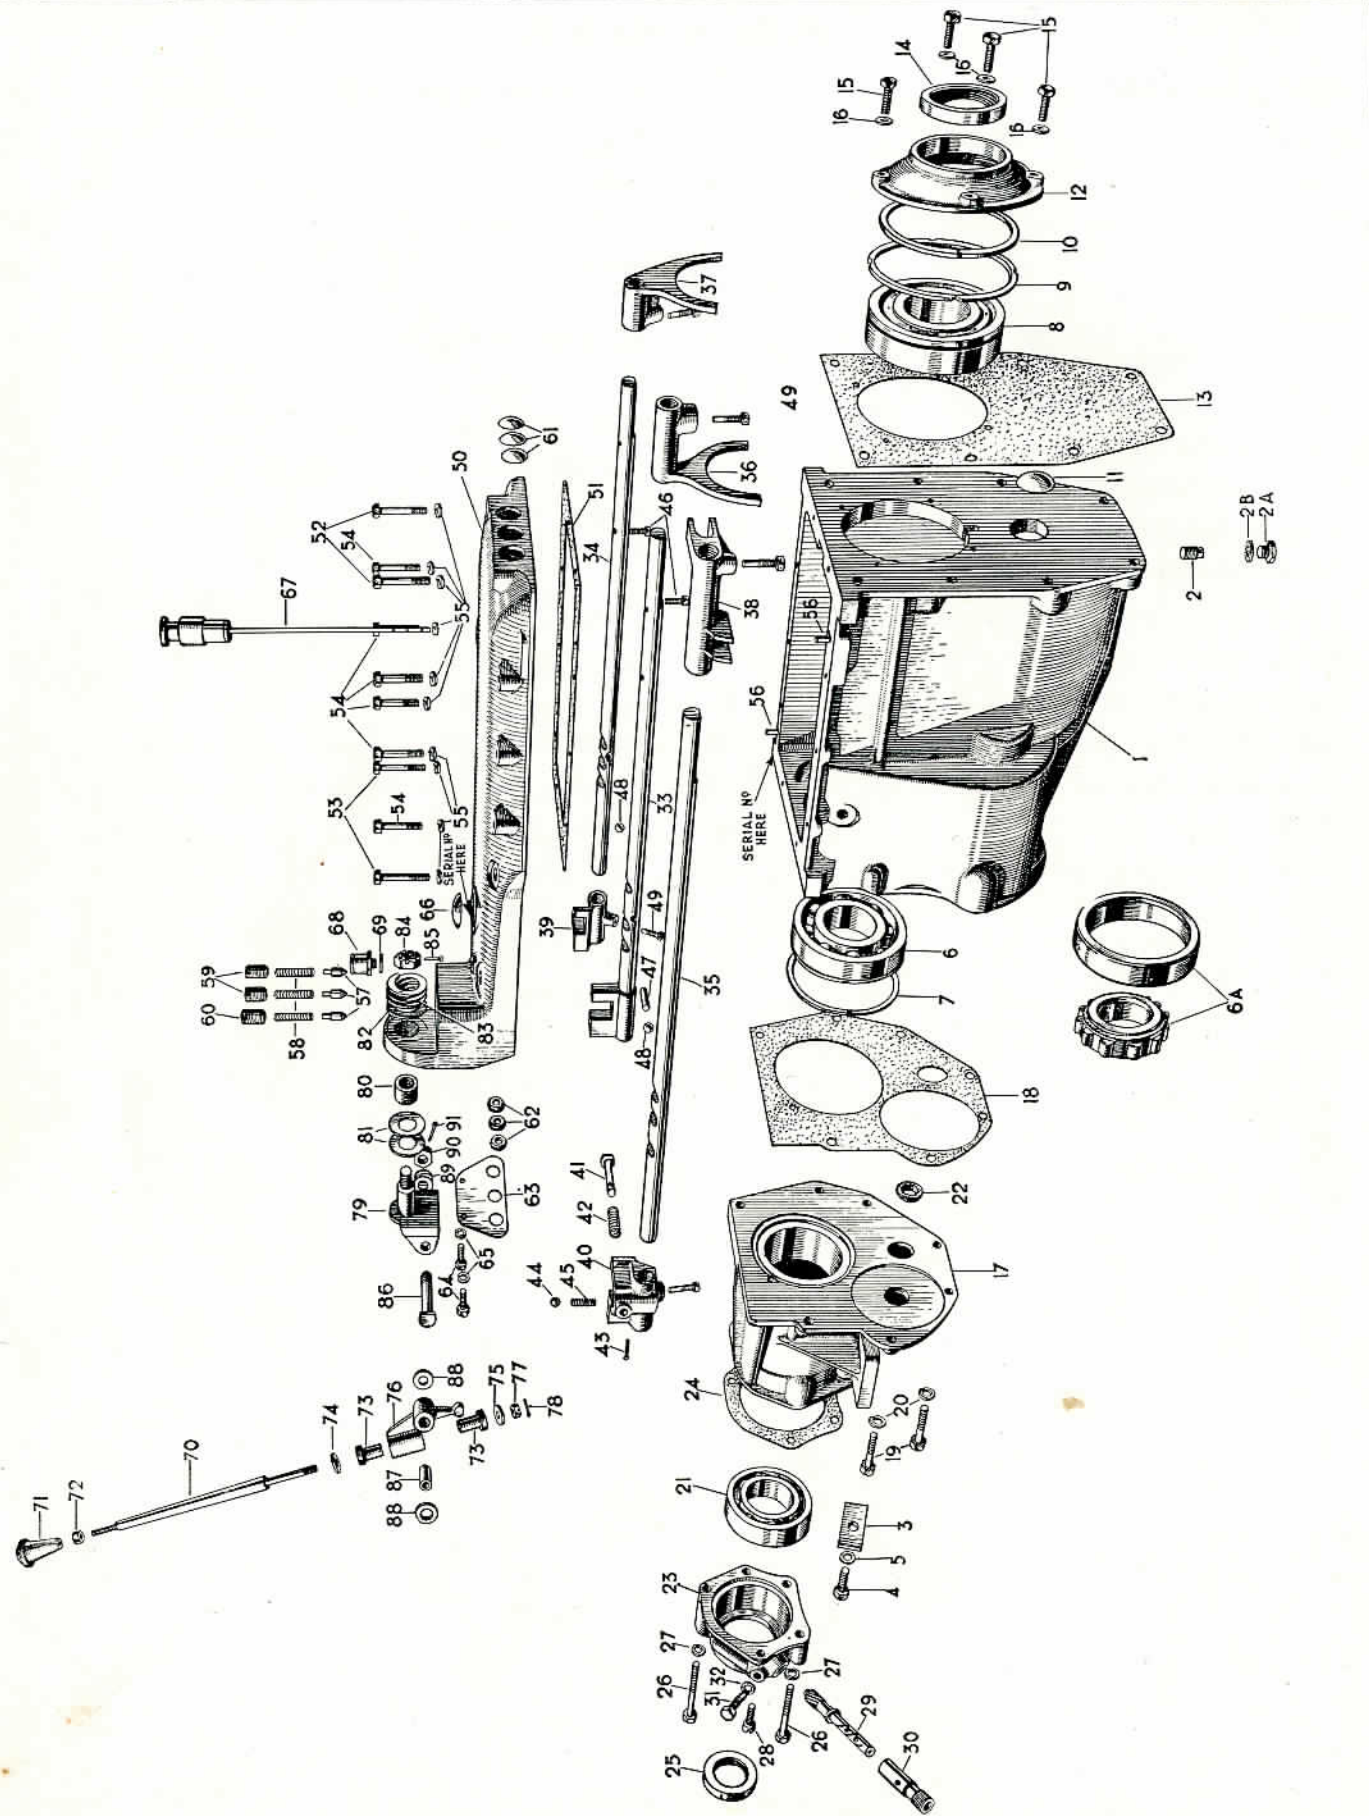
2½ AND 3½ LITRE SINGLE HELICAL GEARBOX. CASE AND REMOTE CONTROL
